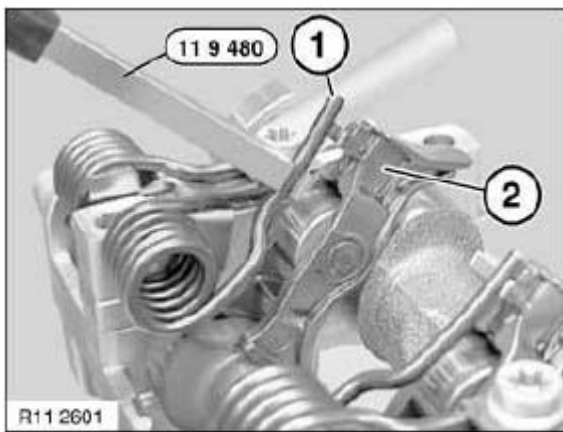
Holding Torsion Spring With Special Tool (11 9 480)
